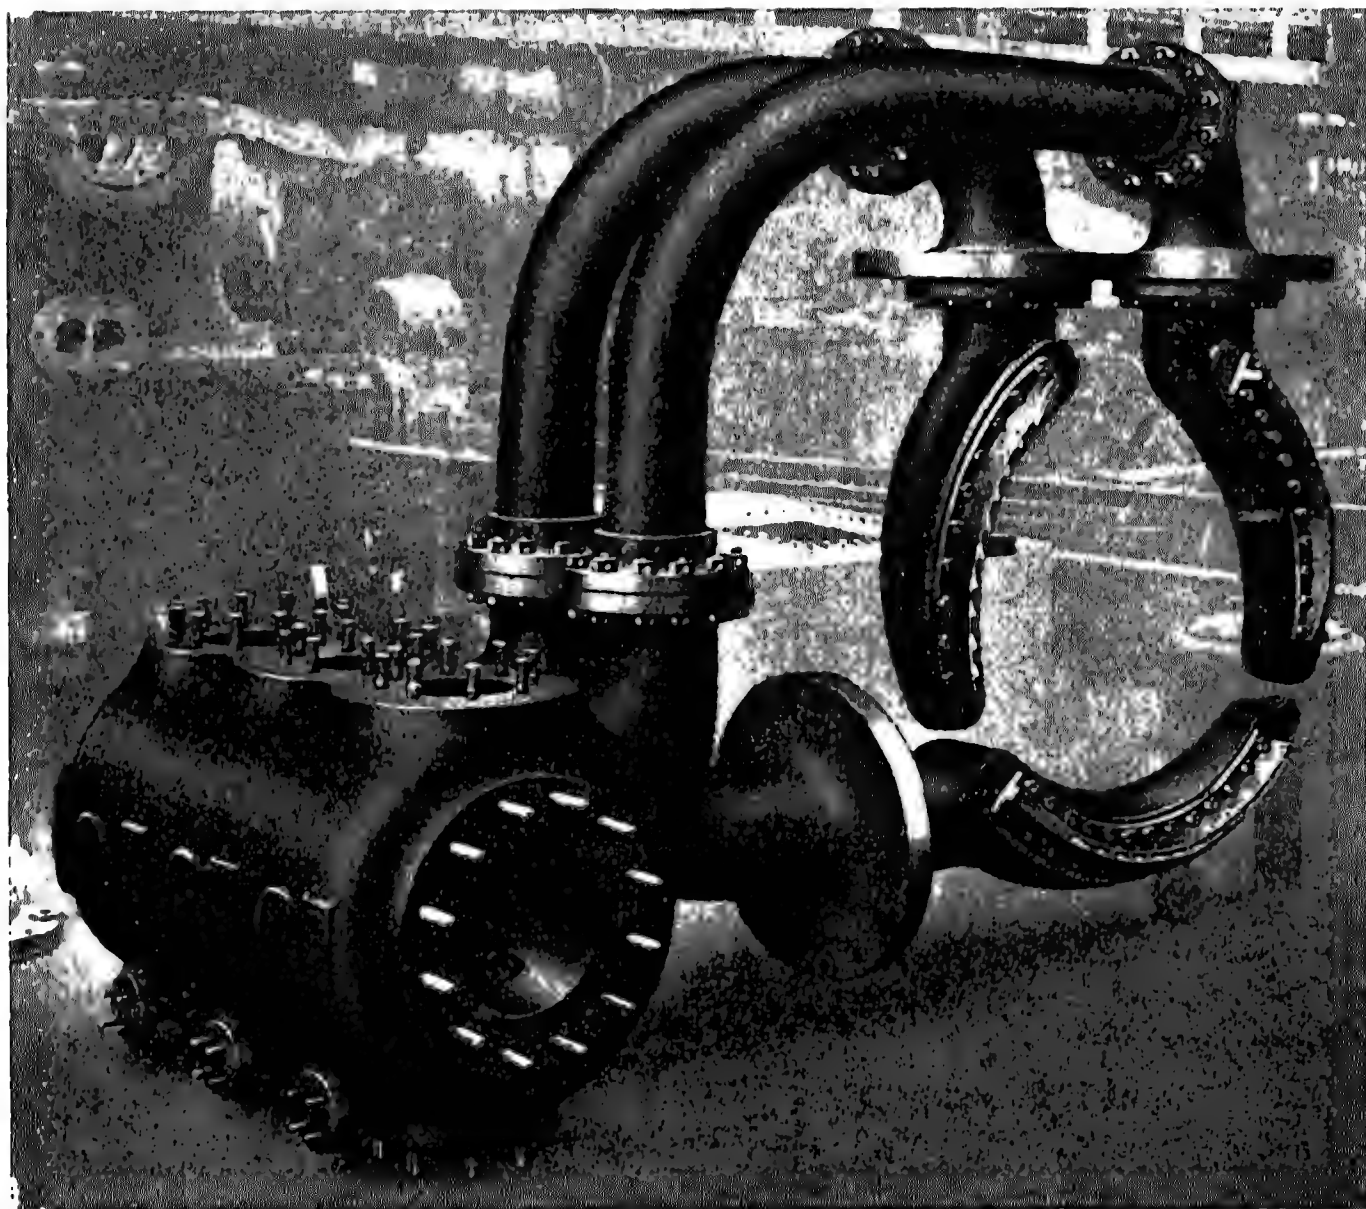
Nozzle Boxes and Connections to Steam Chest
